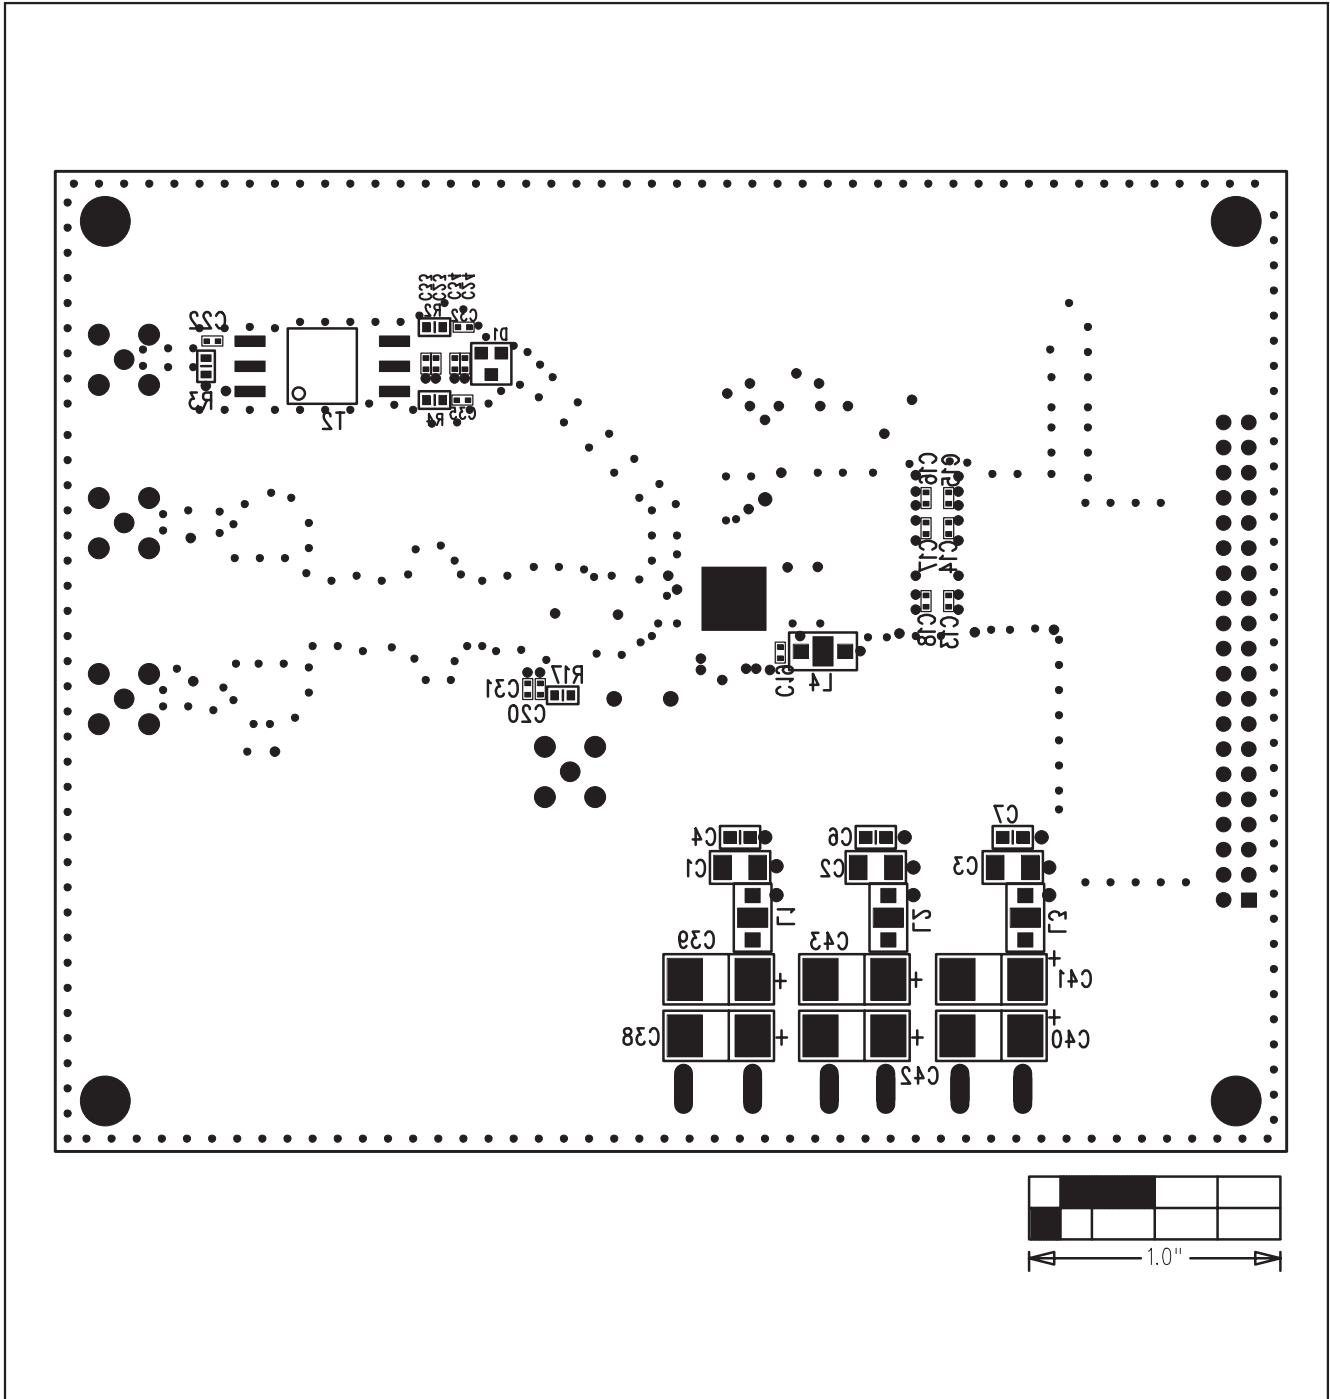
MAX1427 EV Kit Component Placement Guide—Solder Side
